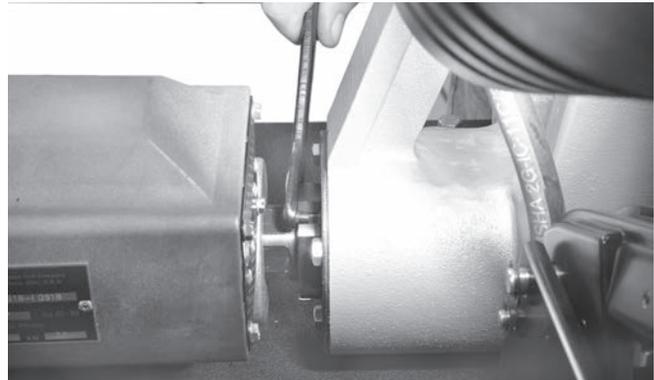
Loosen and Remove Drive Shaft Retaining Nut
